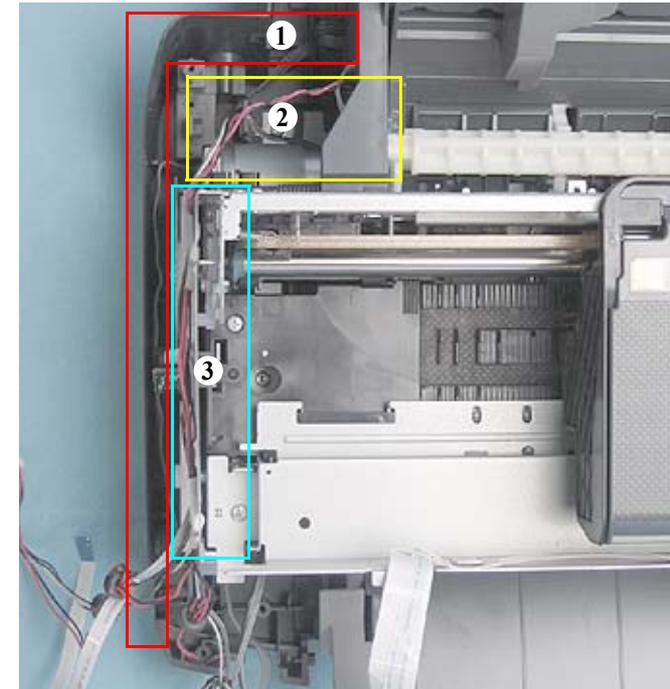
Routing the cables prior to Printer Mechanism installation
